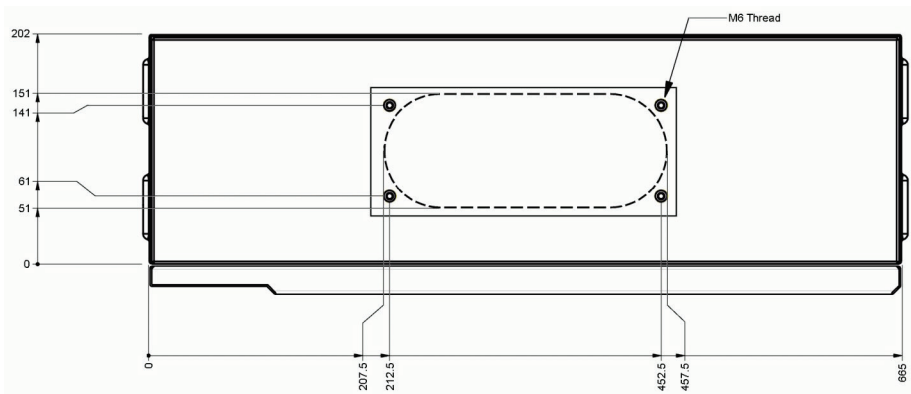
Eaton Sync Control dimensions, top – Dimensions are in millimetres
